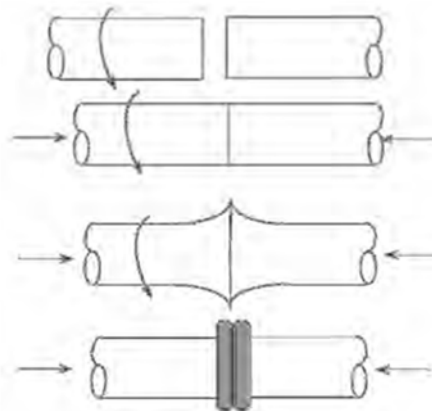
L-1: Basic steps of both inertia and CD friction welding.
